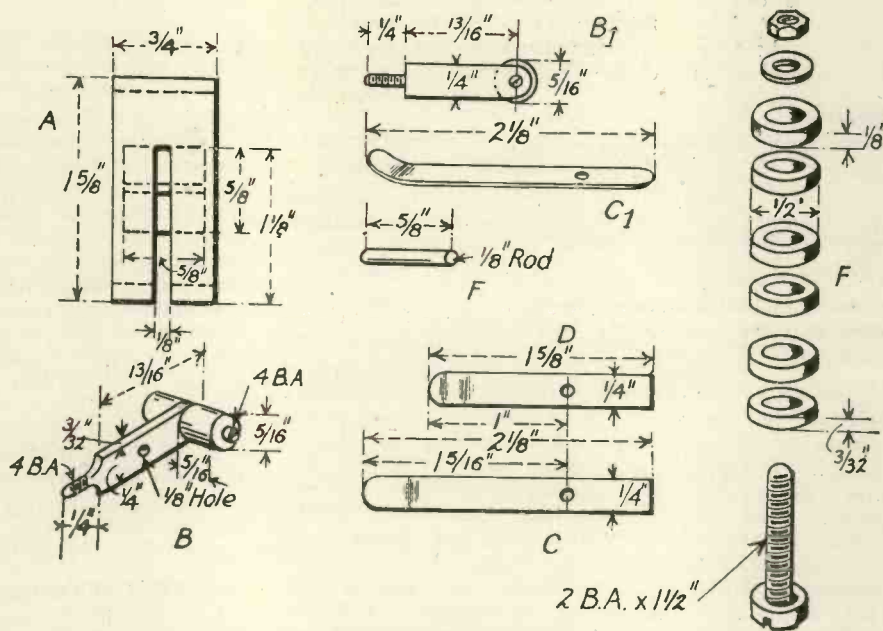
Showing the different parts of the switch mechanism separately and in detail.
